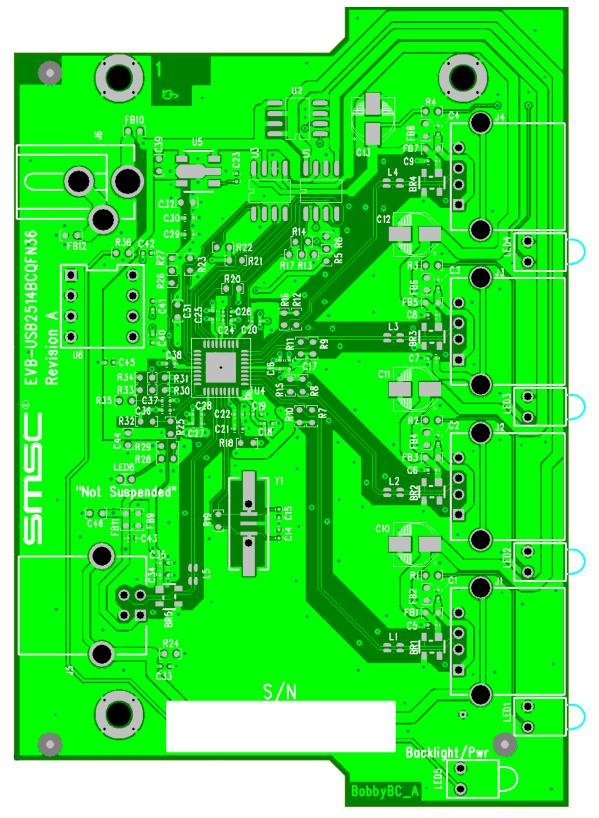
EVB-USB2514Q36-BAS Top Layer - Component Side
